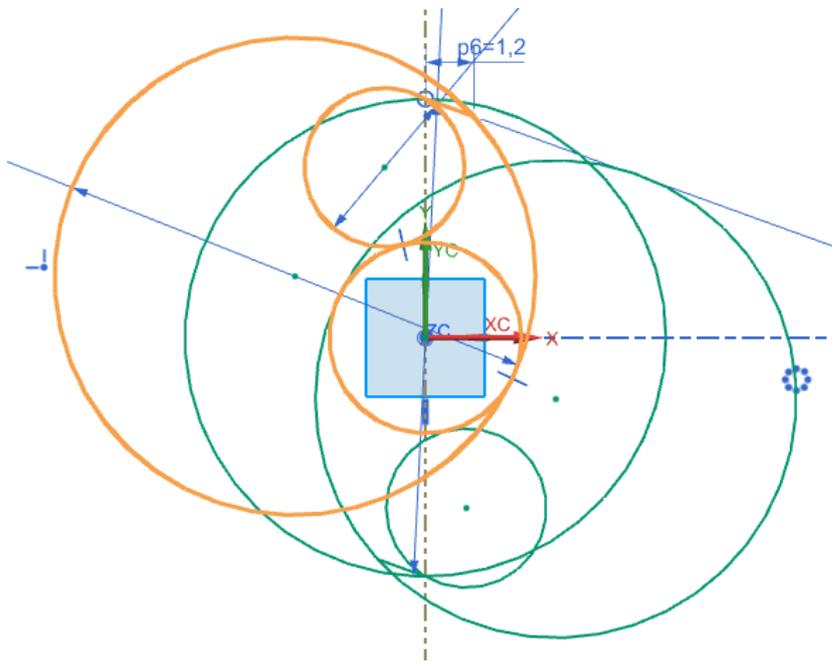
Sketch of the cutter in the face section to trim auxiliary lines.
